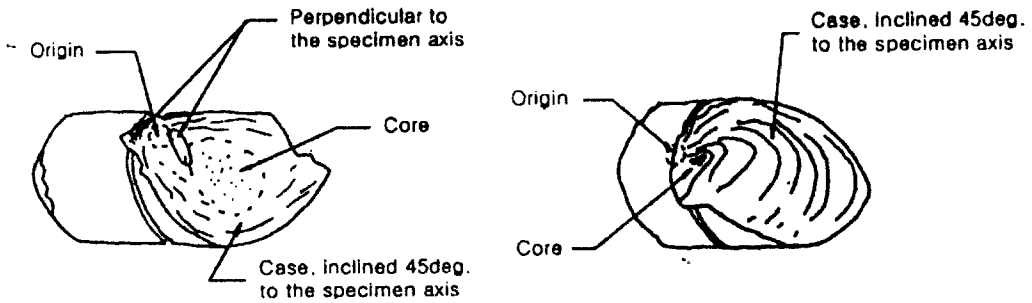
Macroscopic view of fractured specimen by torsional fatigue test. (a) in case depth 4mm and (b) in case depth 7mm
